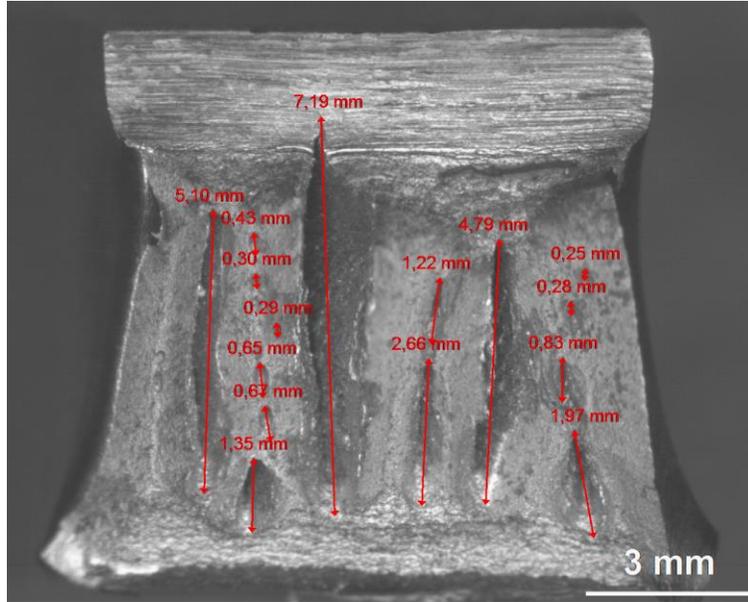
Fracture surface of a Charpy specimen broken at -60°C. Several separations can be seen, as well their length measurements. This specimen was extracted from a rolling stock finished at a temperature 22°C below the A_{r3} point of the steel.
